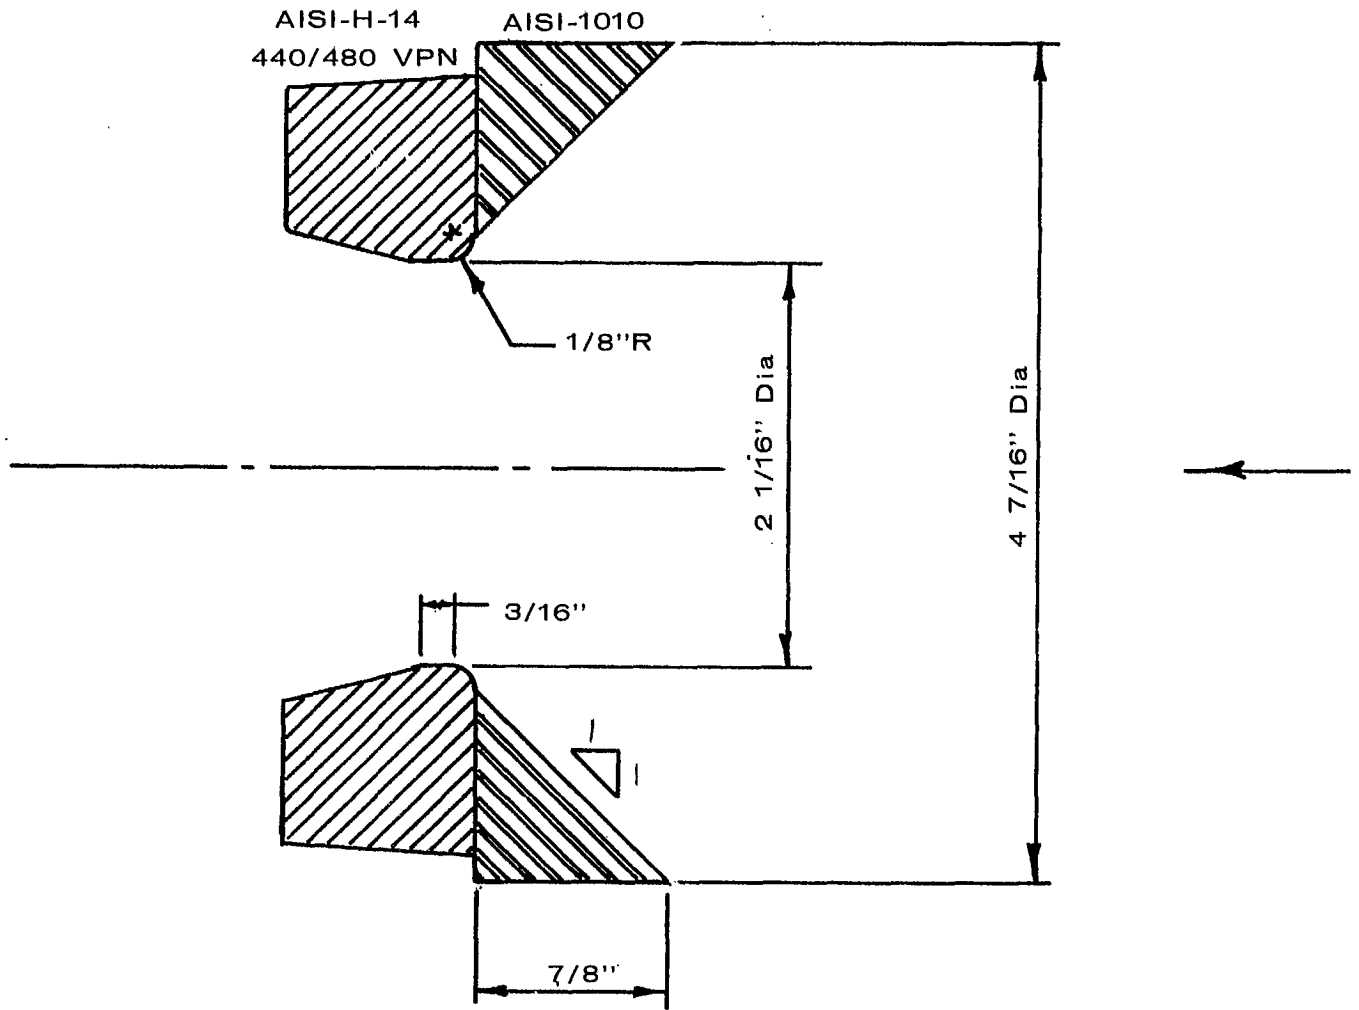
2-1/16 in. Extrusion Die and Cone for 4-1/2 in. Container
